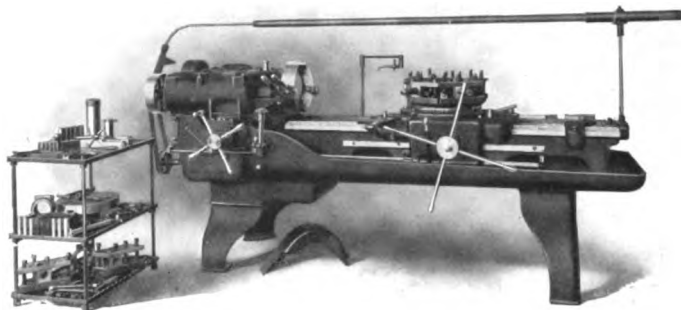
Single Spindle Hartness Flat Turret Lathe with Chucking Equipment
